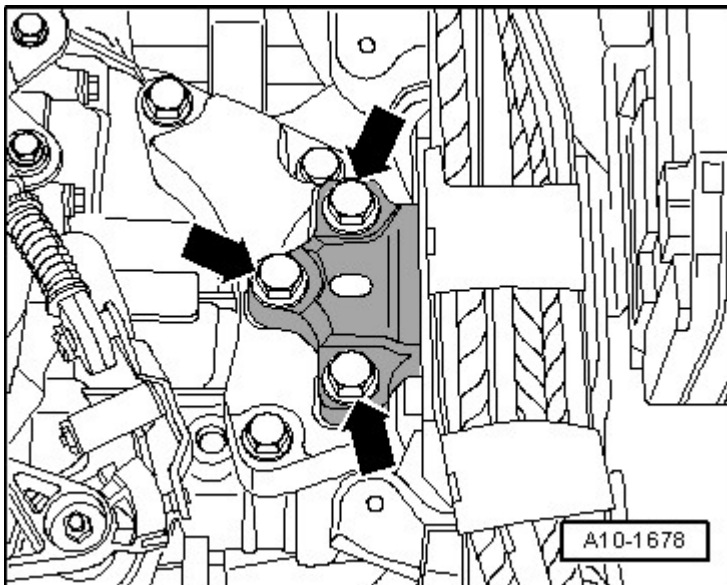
Identifying Bolts To Assembly Mounting On Transmission
